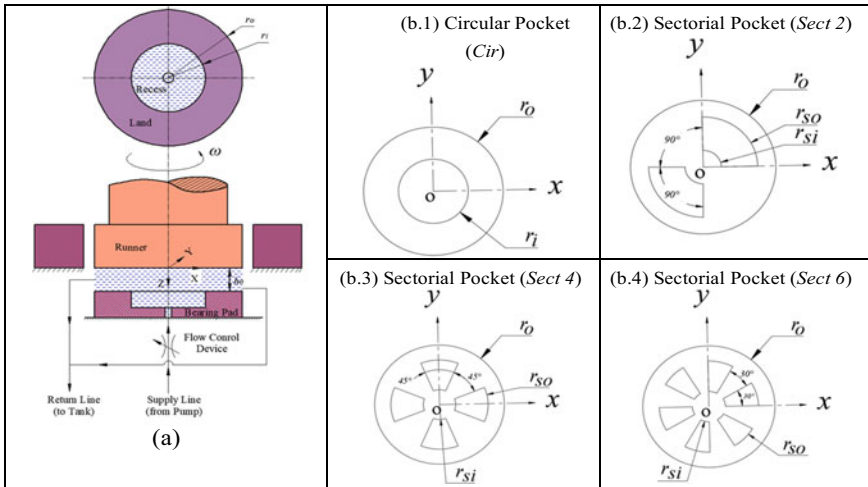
a Hydrostatic thrust bearing and b pocket geometric shapes
